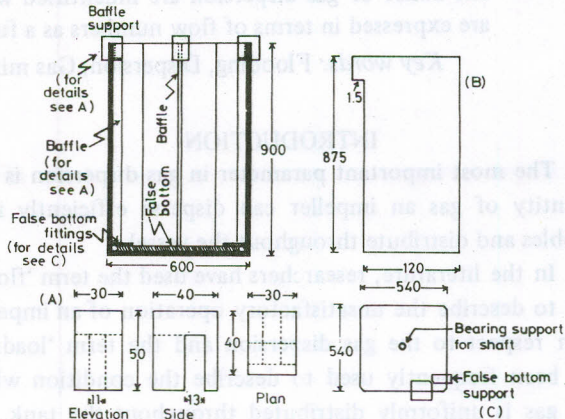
Sketch of the mixing vessel and baffle details (all dimensions are in mm).
